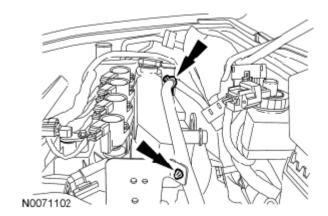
Locating Battery Cable Wire Harness Retainers Courtesy of FORD MOTOR CO.
